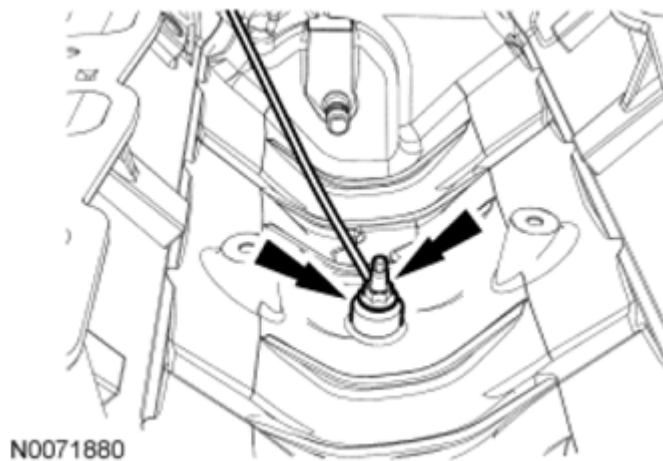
Identifying Silicone Gasket And Sealant Clearance
